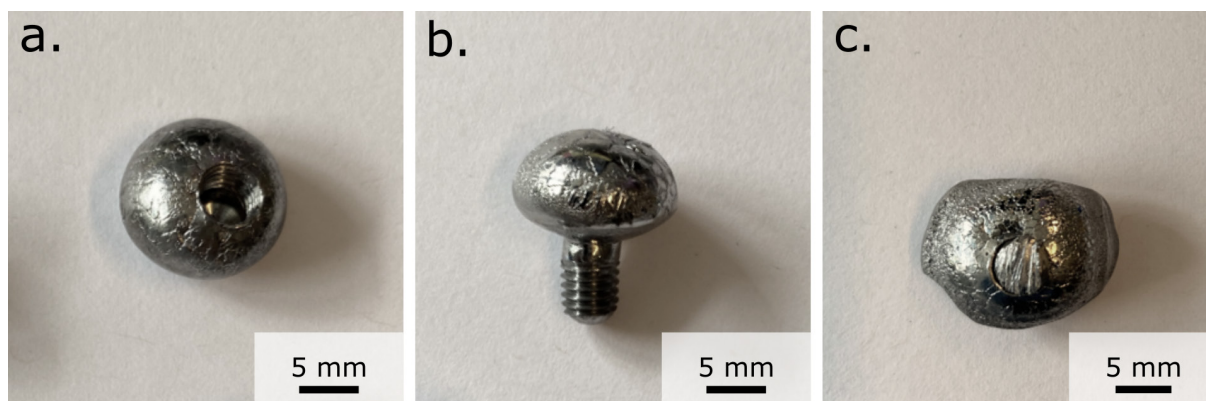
Images of the system used to “encapsulate” ca-silicide powder inside high-purity iron. a) high-purity iron lump after arc-melting (to produce a globular shape) and after drilling and threading a hole in one of its sides; b) high-purity iron piece produce by arc melting and casting, which was threaded and used to close the hole shown in a); c) metal piece after the encapsulation of the powder in which the top portion of the piece shown in b) was cut after screwing the iron bolt shown in b) into the hole shown in a).
